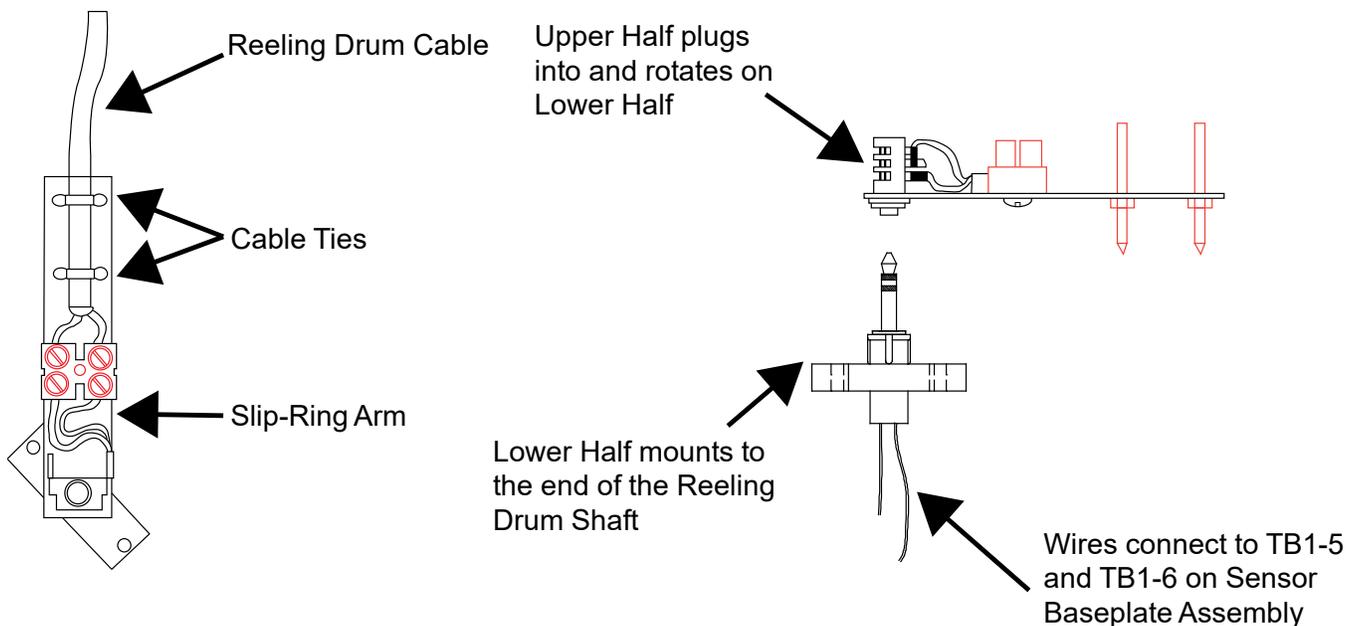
SLIP-RING ASSEMBLY
